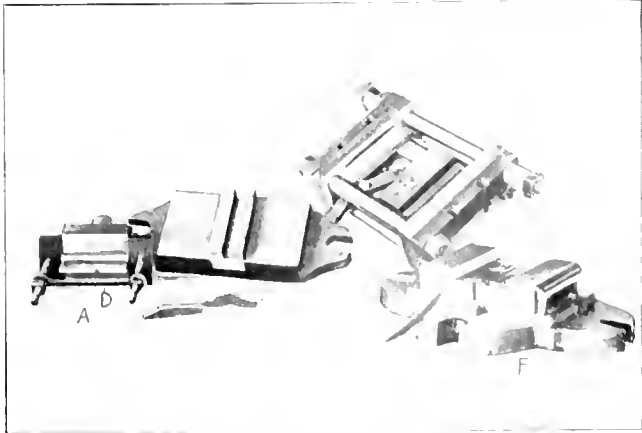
Jaw Forming Punch and Die and Serrating Tools
